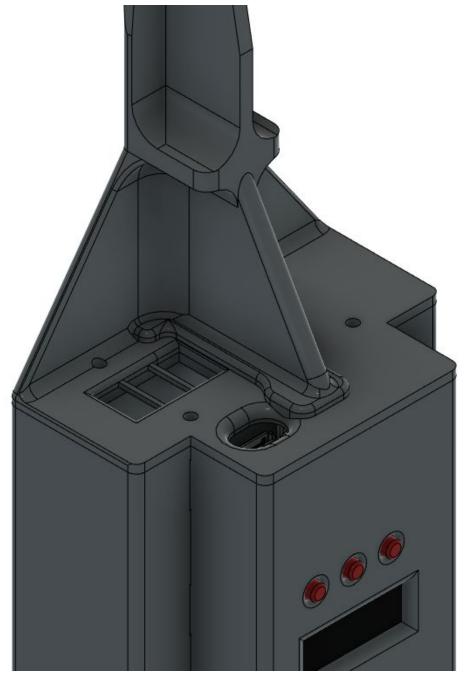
View of spike enclosure placed on battery and PCB enclosure.
